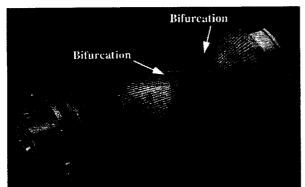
HARCC milled channel OFHC copper liner prior to electroforming.
